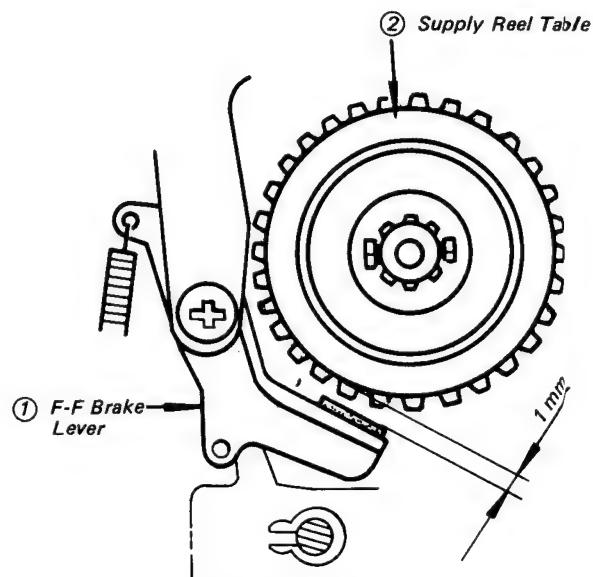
Clearance Required Between End of F-F Brake Lever and Supply Reel Brake
